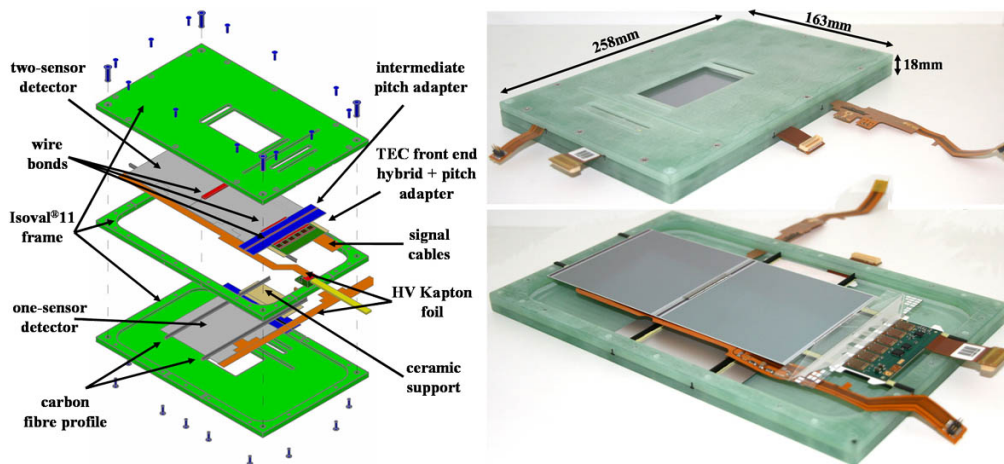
left: technical drawing of one silicon detector module; top-right: closed silicon module without light-tight cover; bottom-right: module without top layer of the frame
